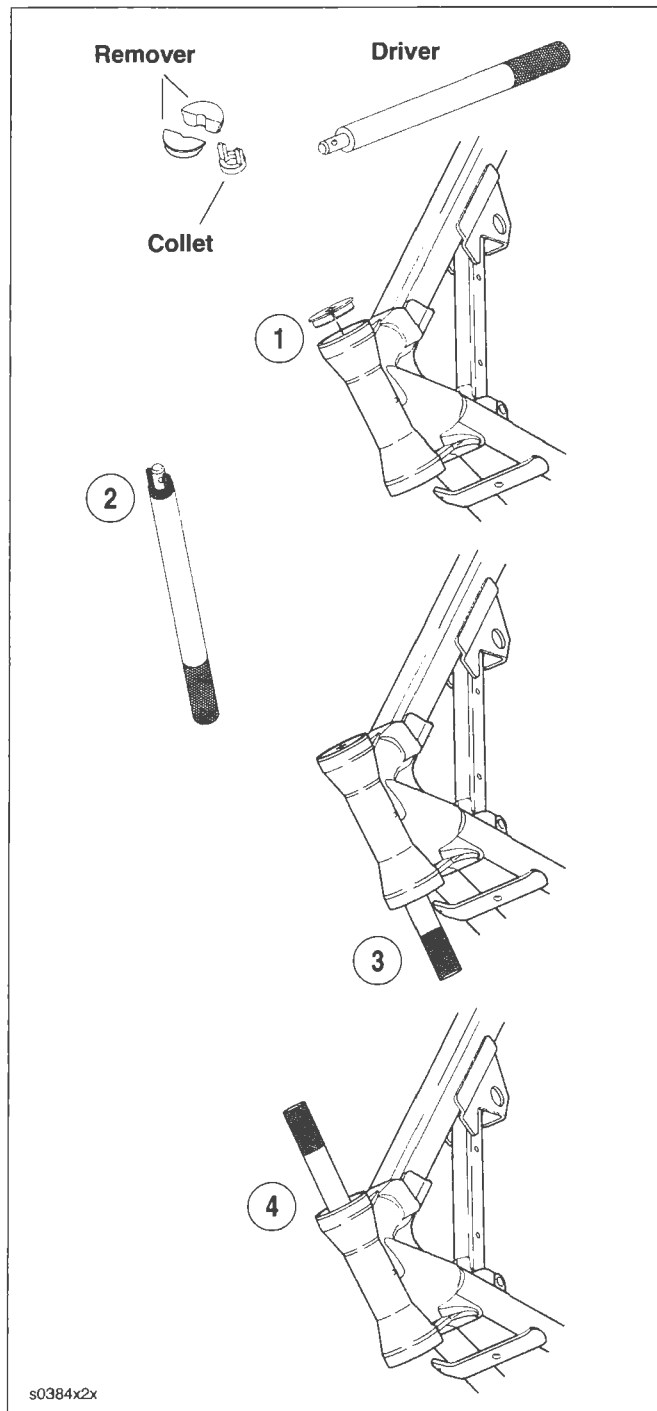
Remove Upper and Lower Steering Head Bearing Races
